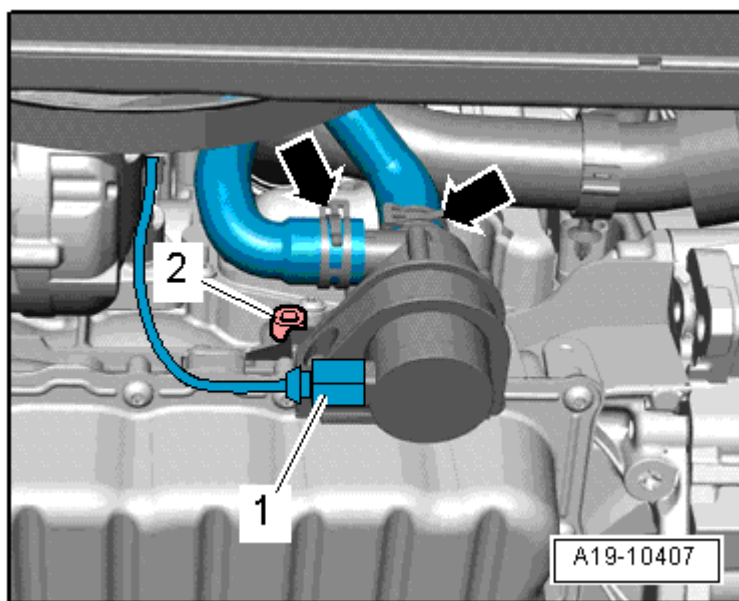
Identifying After-Run Coolant Pump V51 Bracket Bolt -2-
